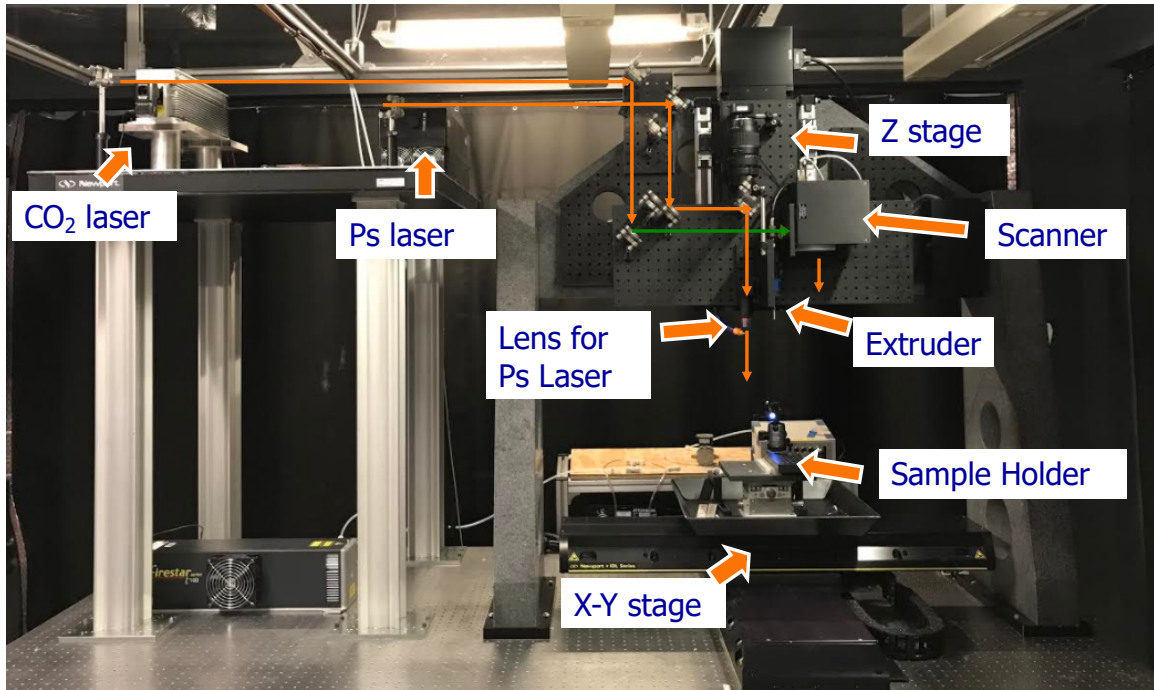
Picture and function blocks of the integrated additive and subtractive manufacturing (IASM) system. This platform integrates a number of advanced manufacturing tools into one single system, including freeze form extrusion, inkjet printing, laser sintering, laser micromachining and an interactive interface to import from CAD models.
